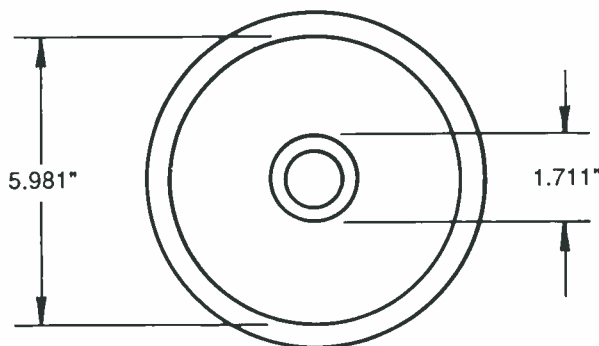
Typical cross section of copper tubes used in 6 1/8-inch, 75Ω rigid line.
